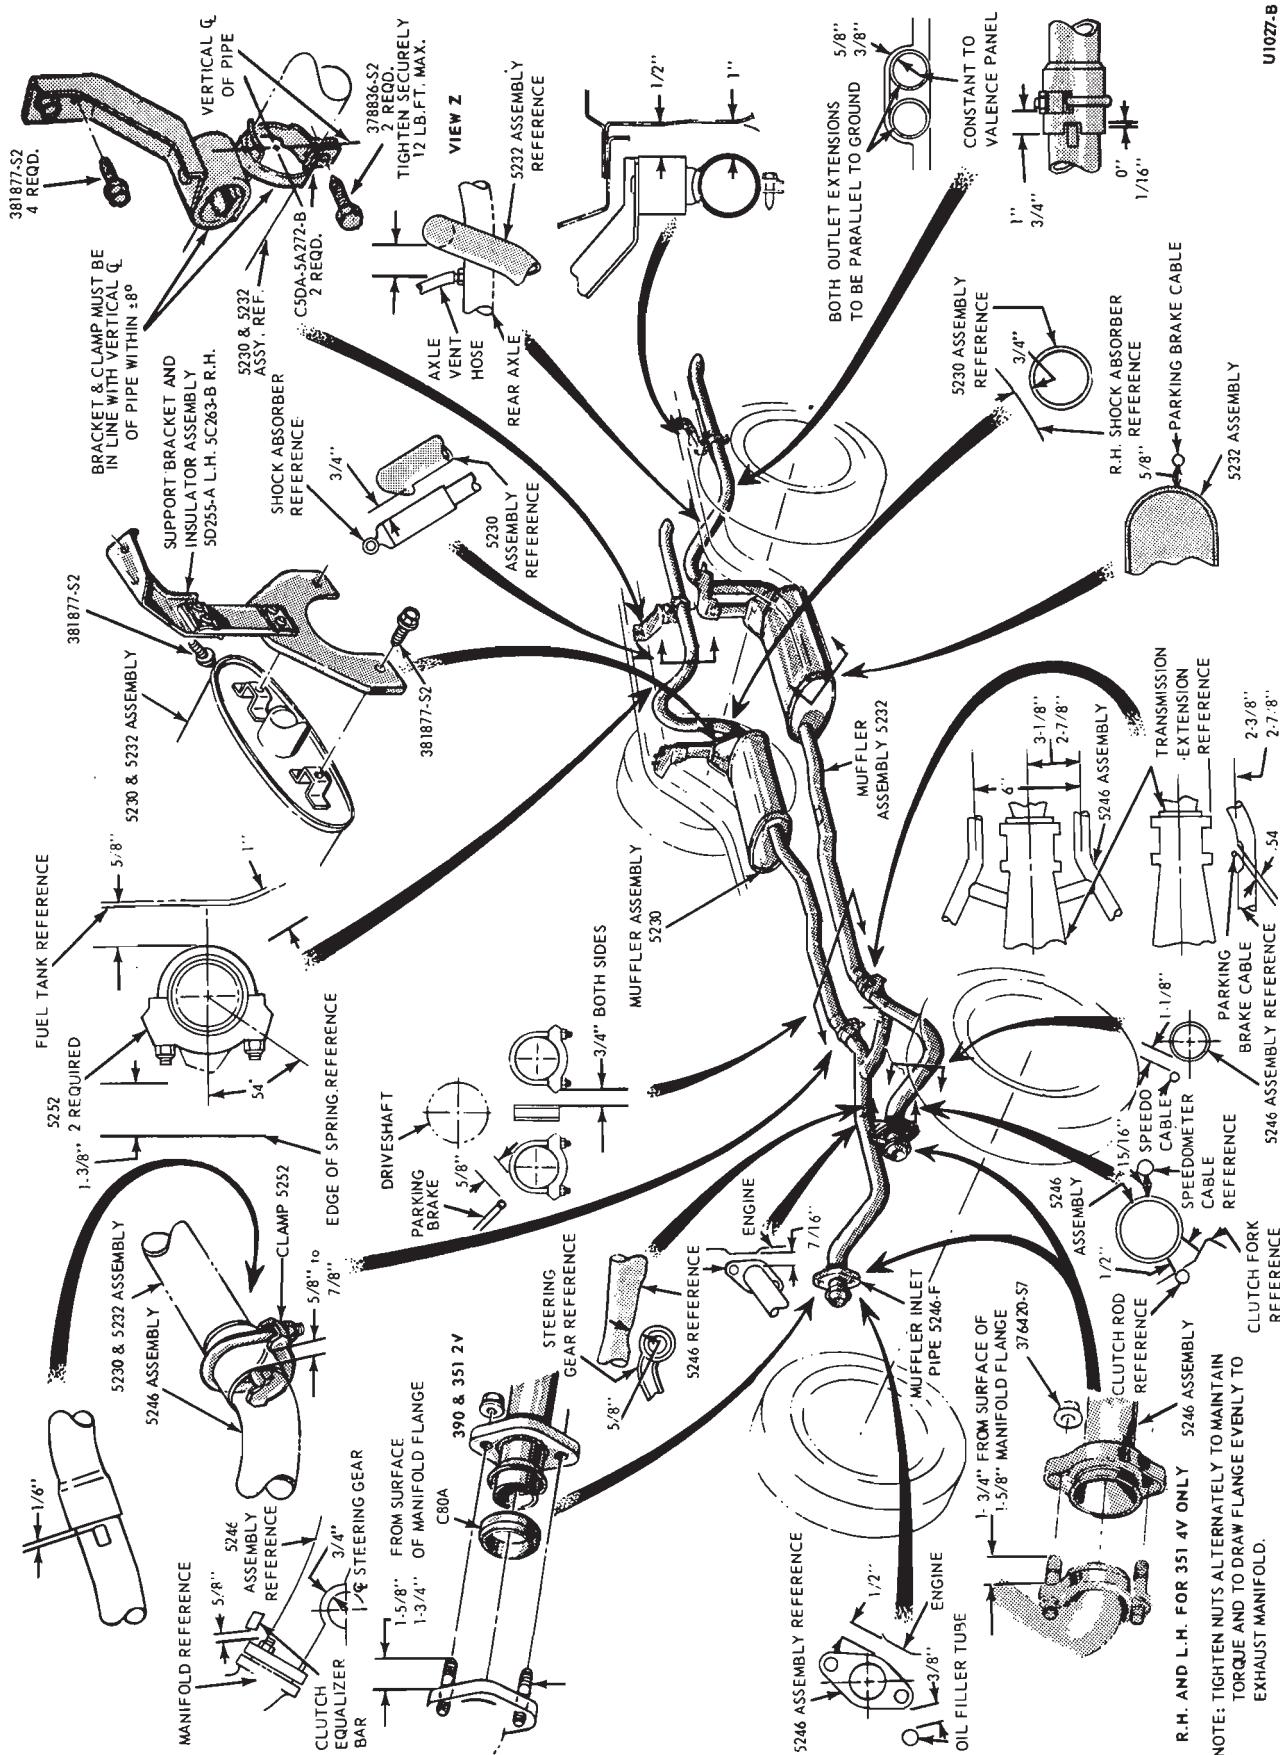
Cougar Dual Exhaust System—351, 390 and 428 V-8 Engines
